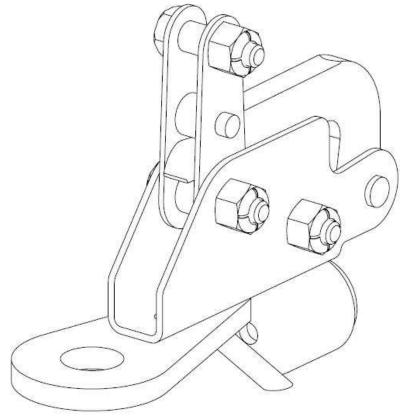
"Bolt On" Tow Hook Assembly with Optional Bumper Stop, P/N: 6030
